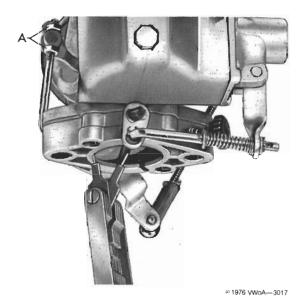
Throttle valve fast idle opening being adjusted.
